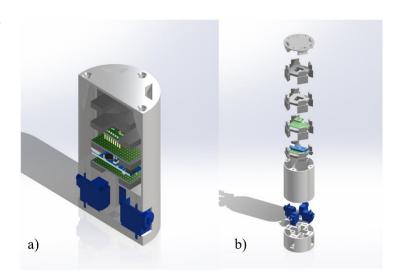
a) Cross section of fully assembled CAD of the R2S; b) Exploded view of the electronics bay.
